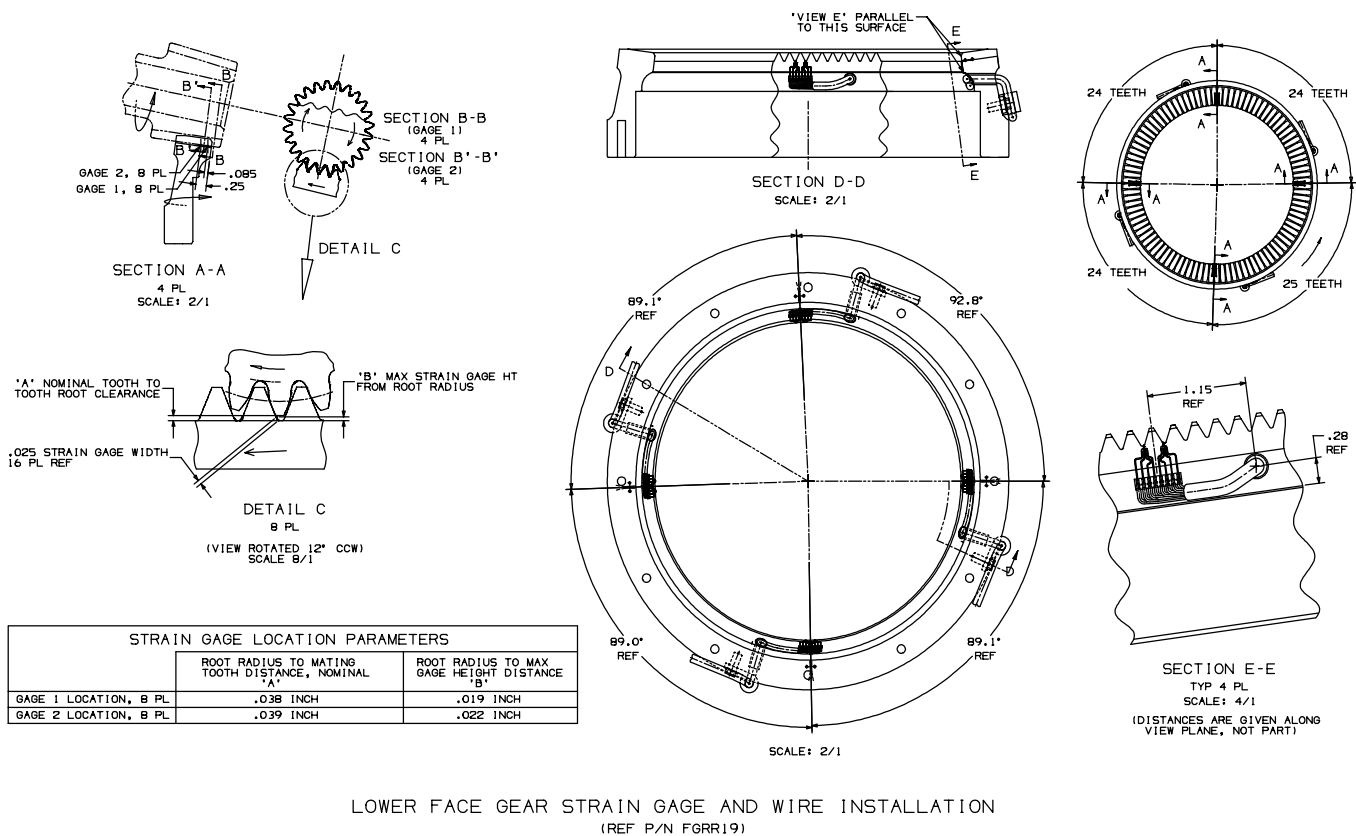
Strain Gage Wiring Diagram for Lower Face Gear
